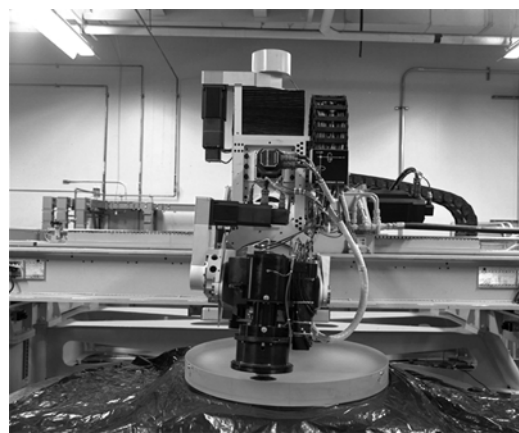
Kodak's small-tool machine. (40-00-0499-0811pb01)
